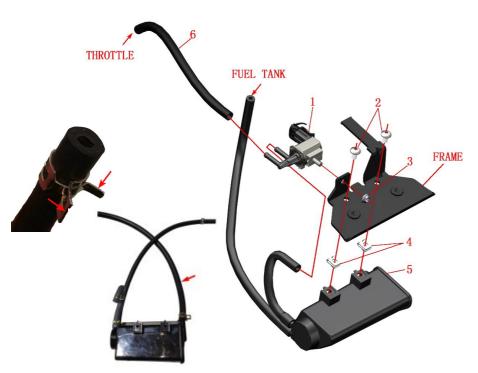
INTAKE SYSTEM		Canister assembly	CHK	(0)
